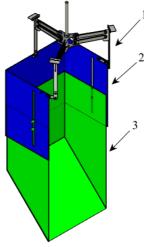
Technical means for adjusting and regulating the uniformity of the air flow: 1 – spacer mechanism, 2 – adjusting casing, 3 – air intake
